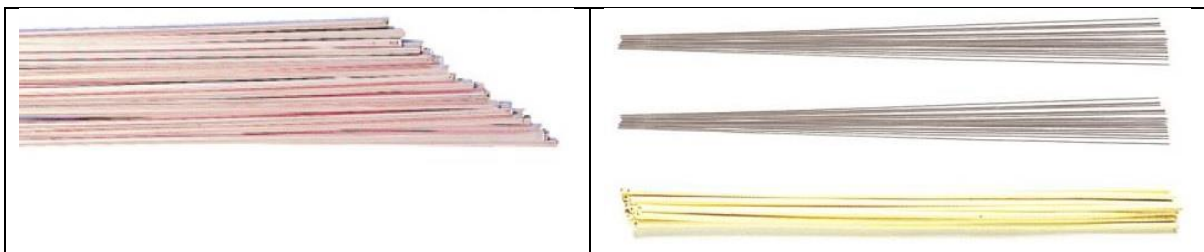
Brazing rods (left), silver rods and flux covered silver brazing rods (right) (Source: Perkeo)
